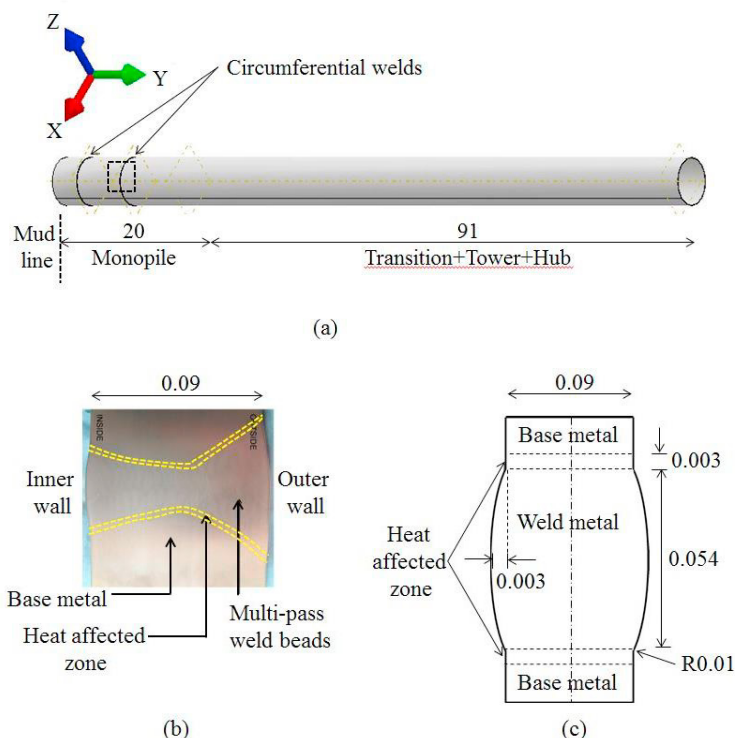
(a) OWT model with sections above mud-line, (b) cross-sectional view of circumferential weld geometry (Jacob *et al.*, 2018), (c) schematic of region highlighted in (a) showing the idealised weld geometry used in the FE model. [Note: all dimensions are in meter].
